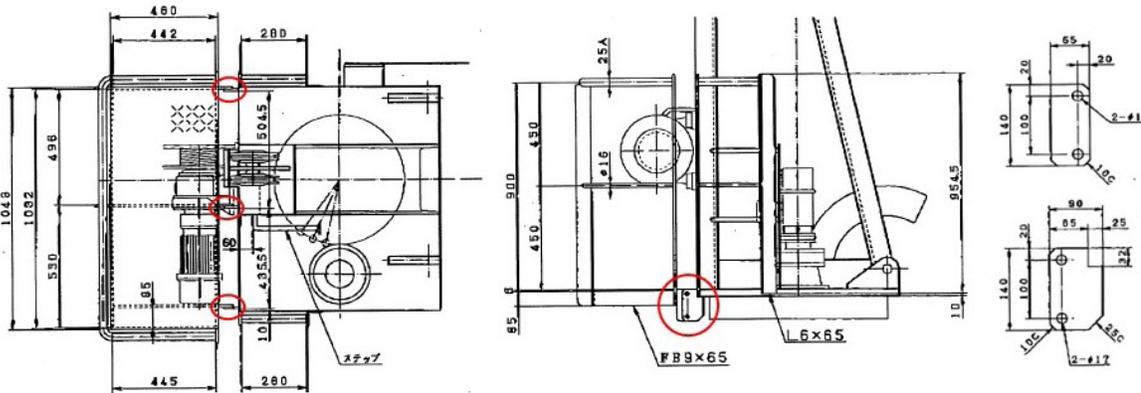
Drawing of the lower stage for the port provision crane. The brackets are circled in red. Note the absence of a physical connection at the railing. On the top right is a drawing of the bracket that is welded to the platform extension and bottom right is a drawing of the bracket that is welded to the main platform.<sup>2</sup>
